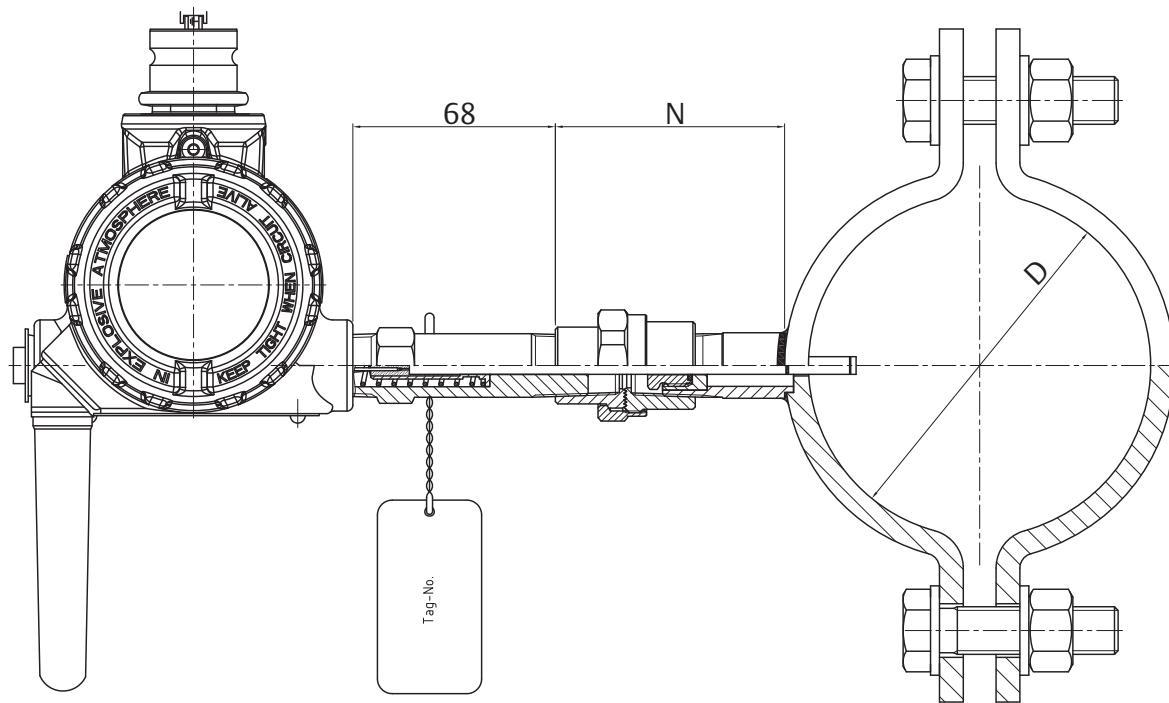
Pipe Clamp Sensor Assembly with Rosemount 648 Wireless Transmitter
